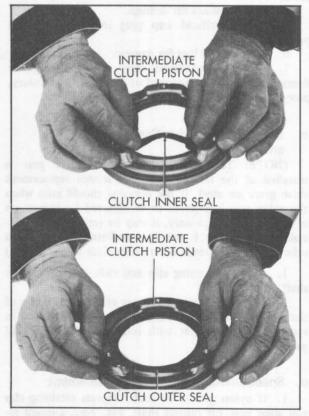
Installing Intermediate Clutch Piston Seals
